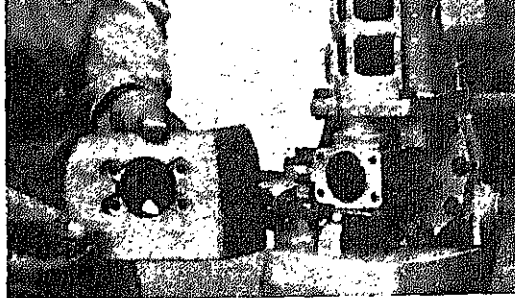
The casing is removed by unscrewing the four retaining screws on the front of the casing
